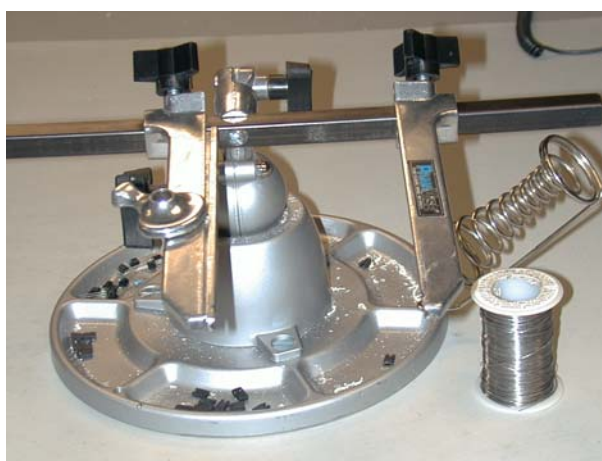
Optional equipment includes a PCB vise and an inspection microscope 7-40X
